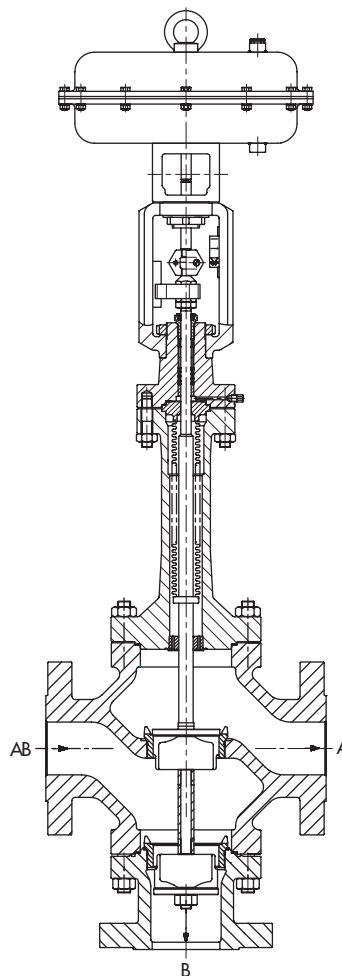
Type 3253-7 Control Valve with Type 3277 Pneumatic Actuator (only up to DN 100), body version for DN 40 to 500, plug arrangement for diverting service (anti-rotation fixture for DN 50 and higher)
